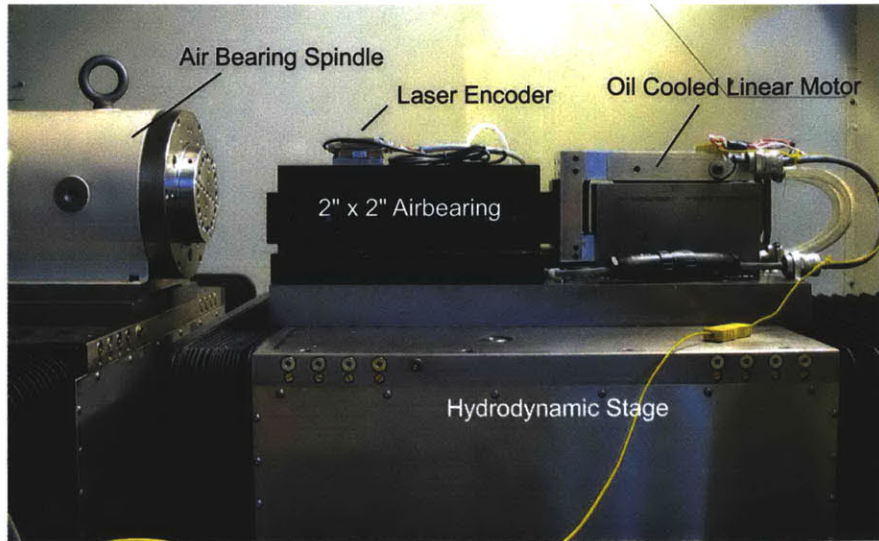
Photo of the prototype long stroke fast tool servo mounted to the Moore Nanotechnologies machine base.
